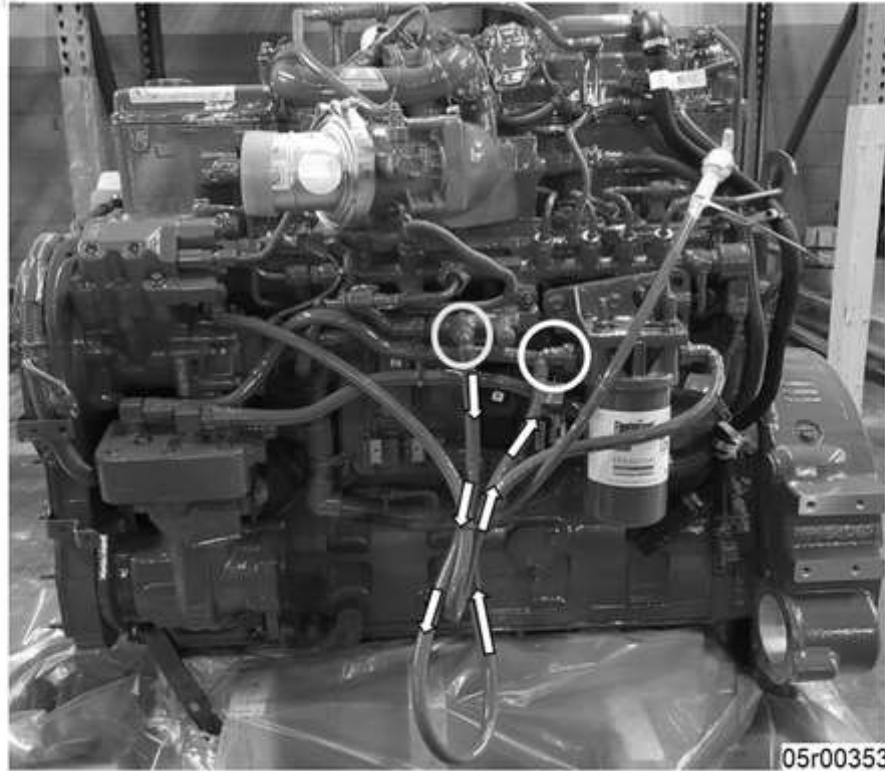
, Indication of Fuel Pump Gear Pump Outlet, Fuel Manifold, and Fuel Filter Inlet Quick Connect Fitting Locations.
